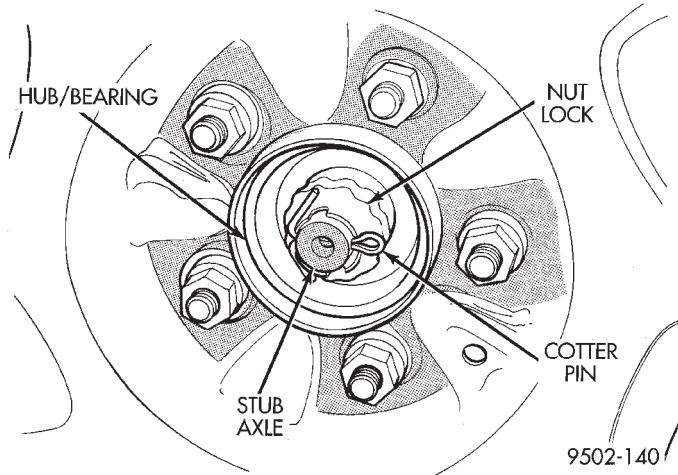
Hub/Bearing To Stub Axle Retaining Nut
